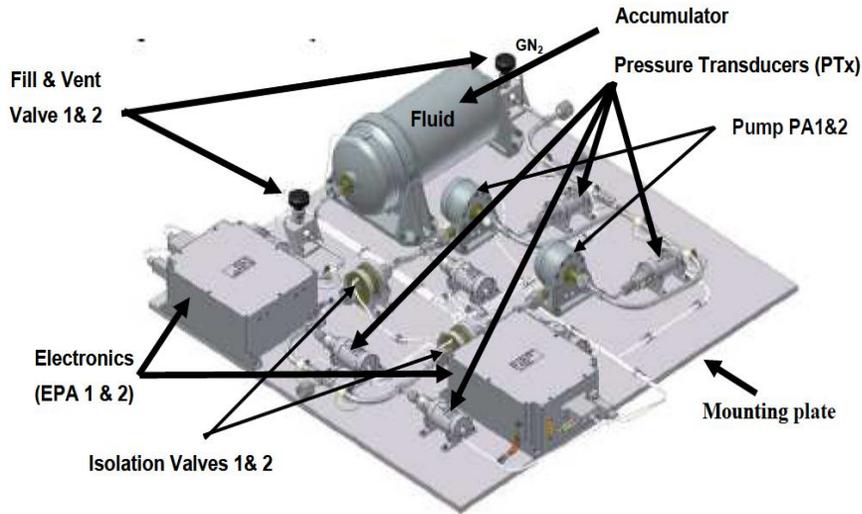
MPFL Pump Packages Assembly (835 x 740 x 160 mm)
